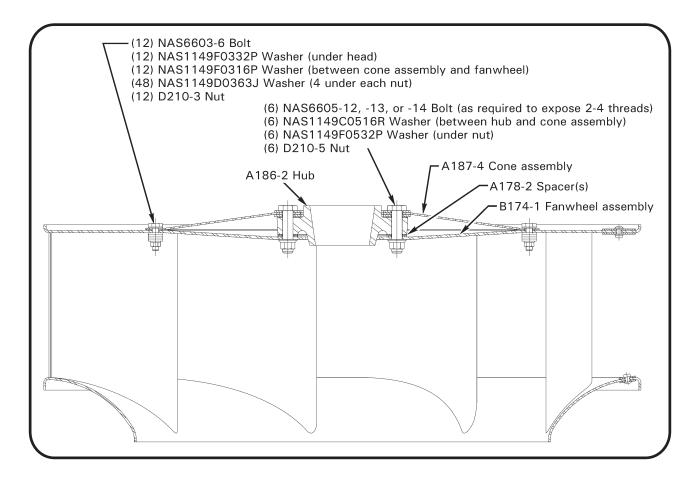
B174-1 FANWHEEL ASSEMBLY
